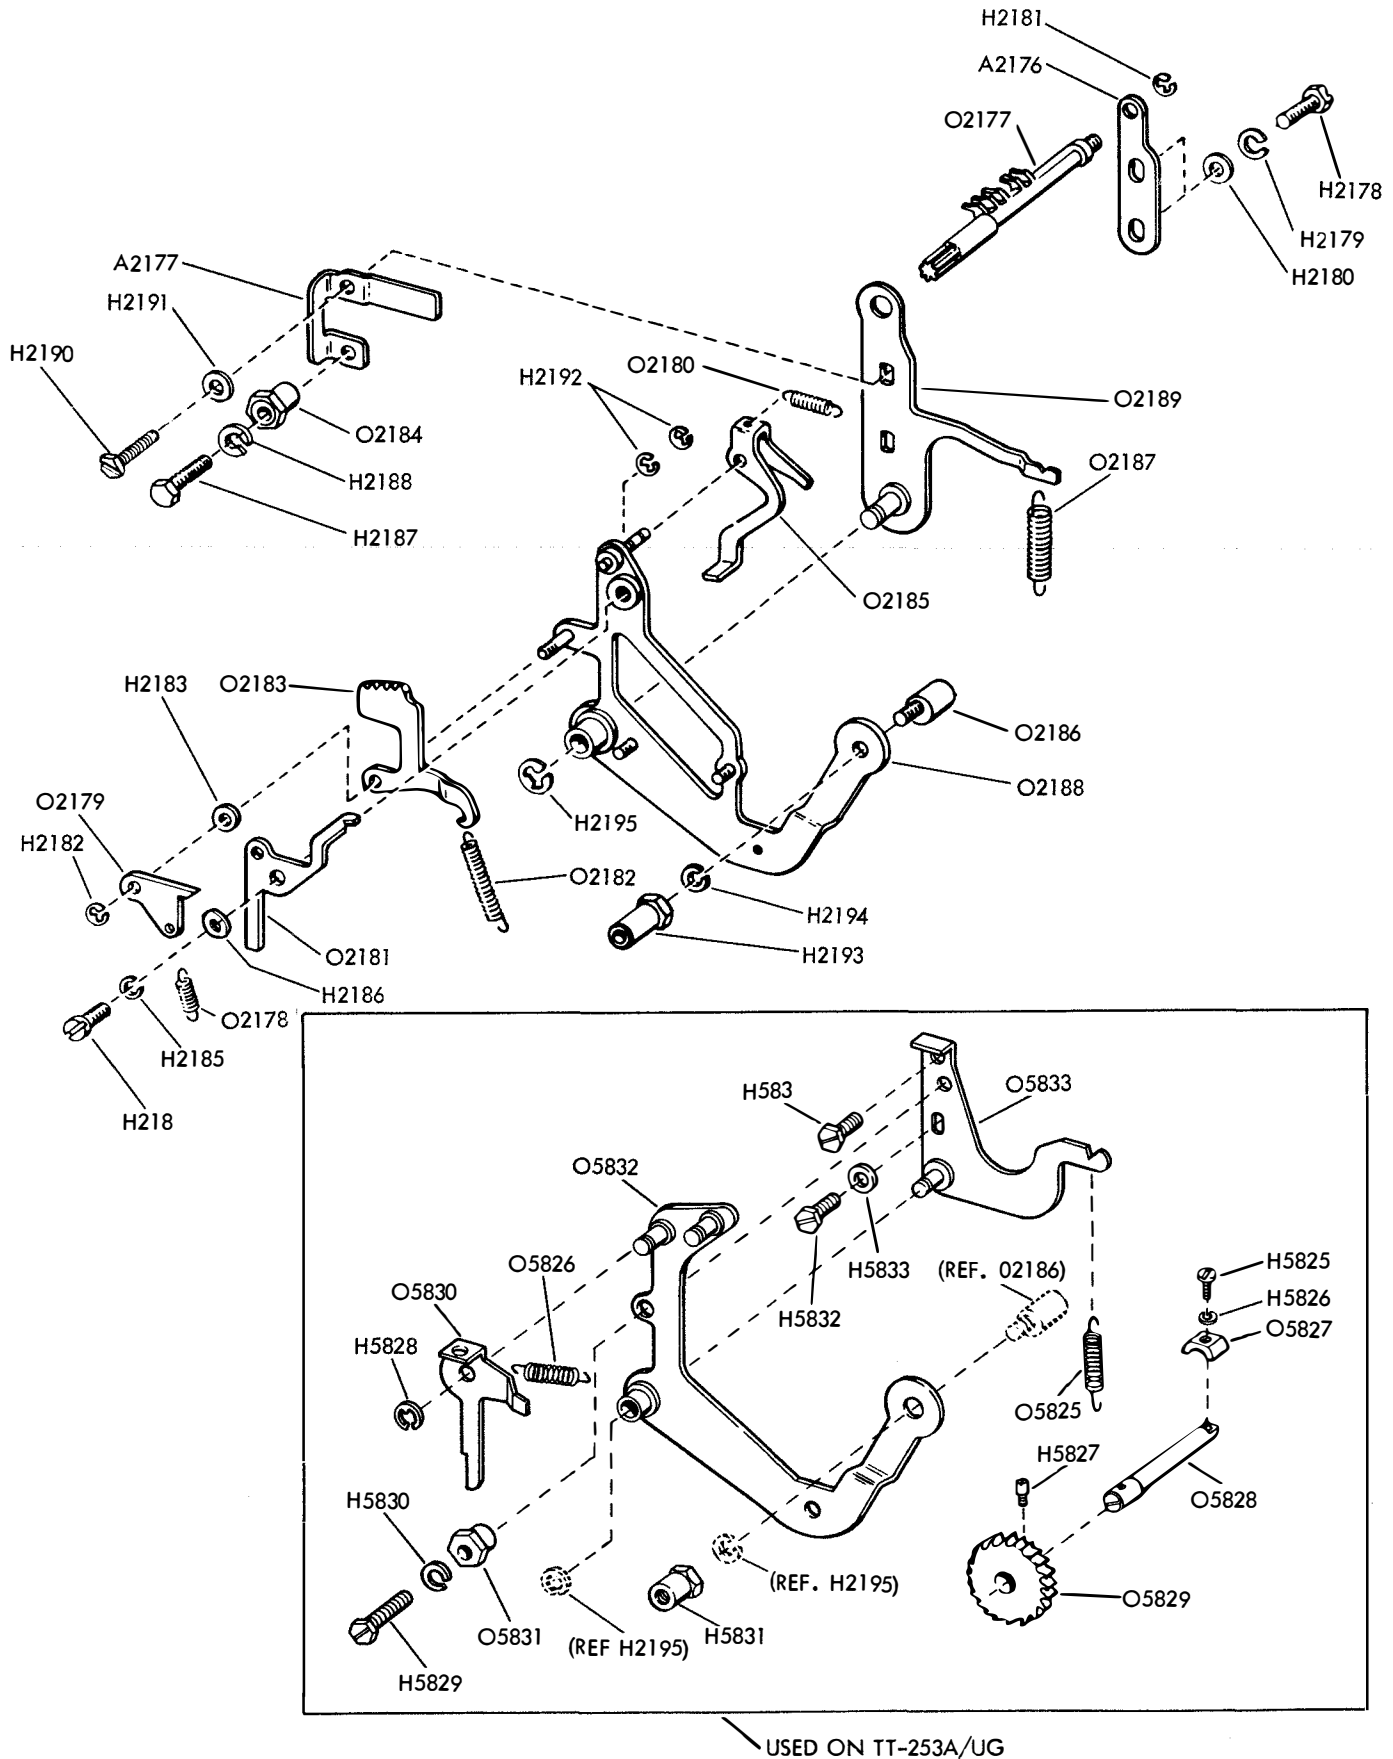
Typing Reperforator, Tape Back Space Mechanism
